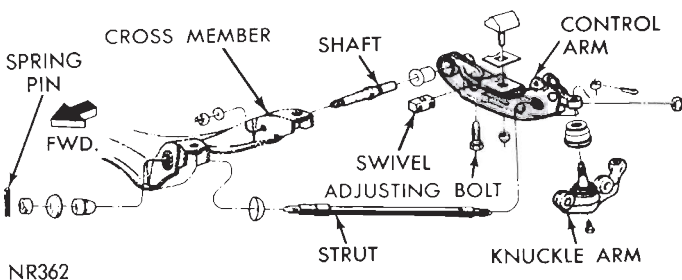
Lower Control Arm (Valiant-Barracuda)
